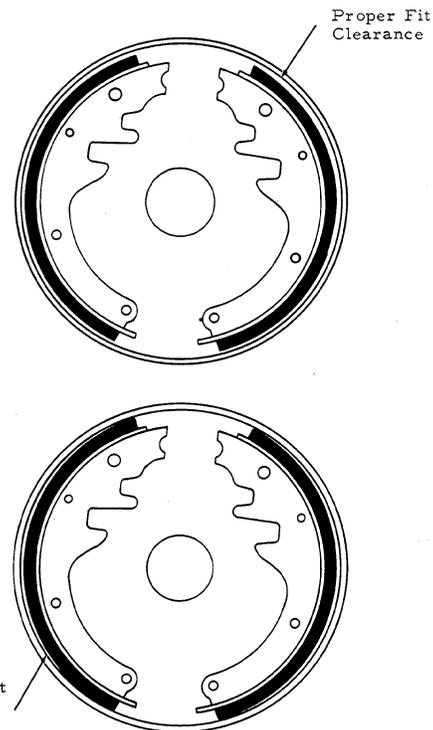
Proper and Improper Brake Lining Fit (T-72577)
